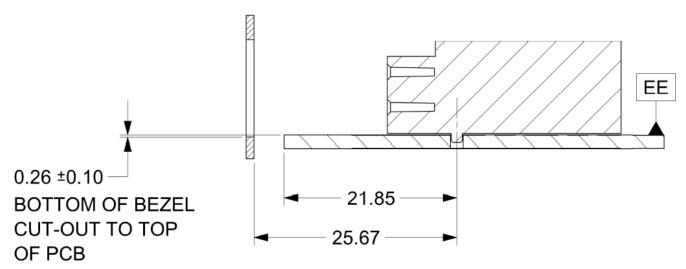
Surface Mount Bezel Panel Cutout, X4
